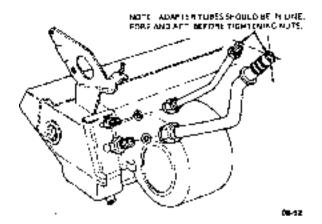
Evaporator Inlet and Outlet Pipes and O-Rings
